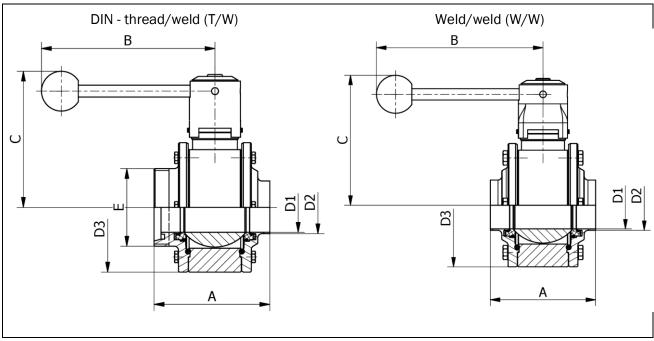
Ball valve with handle: Connection variants: thread/weld, weld/weld
